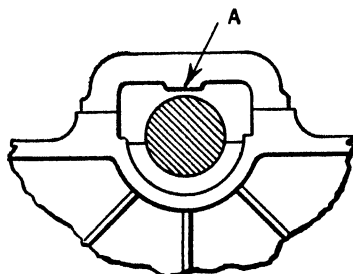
Bridge Gauge for Measuring to Crankshaft
